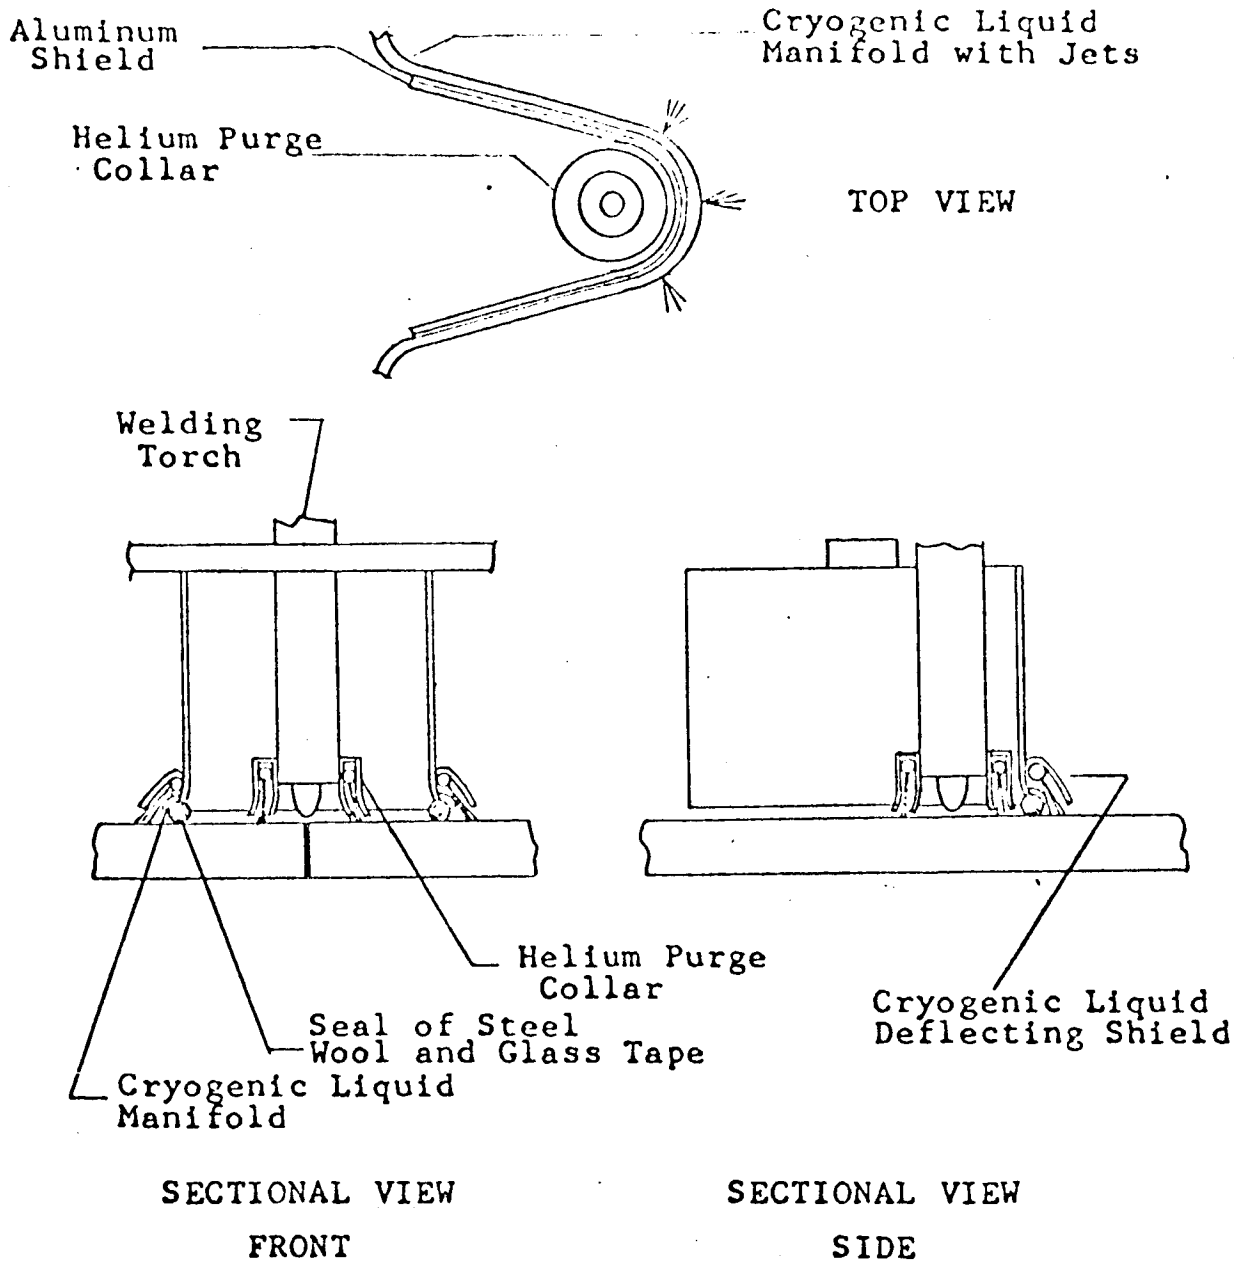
Jet System No. 6 for Front Side Chilling of Weldments using a Cryogenic Liquid — Traveling Shield with Helium Purge Collar
